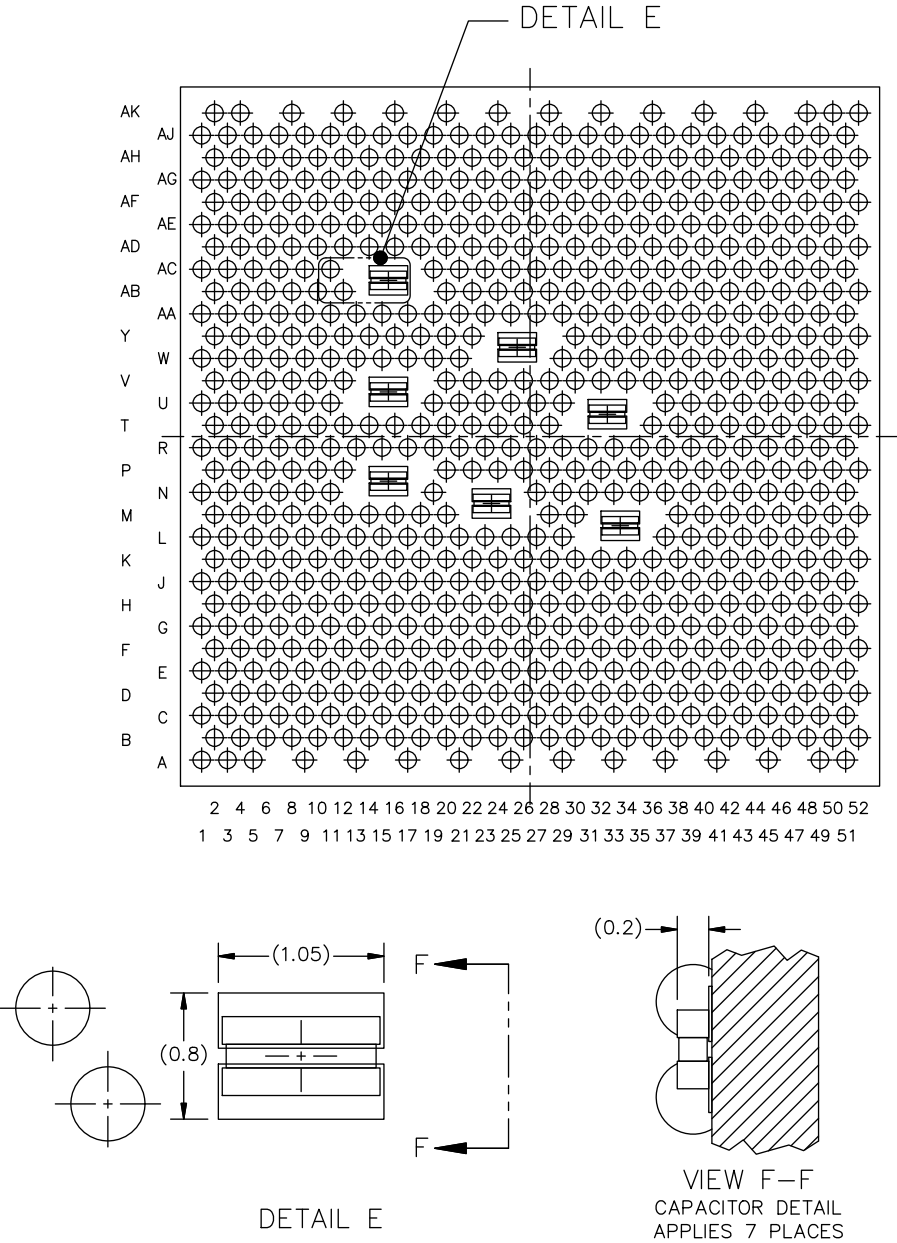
Package outline FC-PBGA716 (SOT2204-1)
